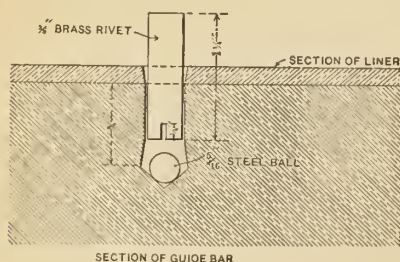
Lining Locomotive Guide Bars for Lateral Wear.
